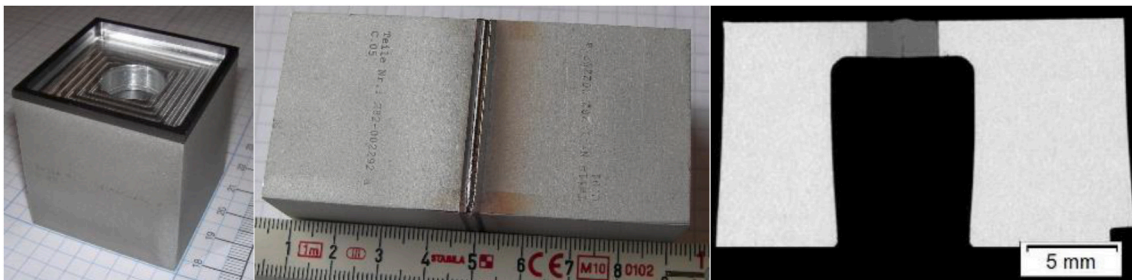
Al/Ta sample before (left), after welding operation (middle) and cross-sectional view of the Al/Ta sample (right)
